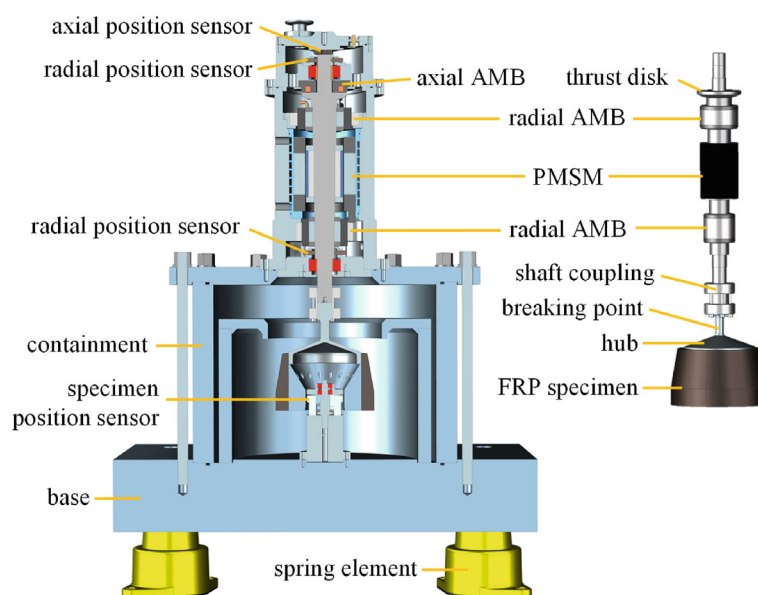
Left: Cross section of the test rig; right: Rotor with the specimen
